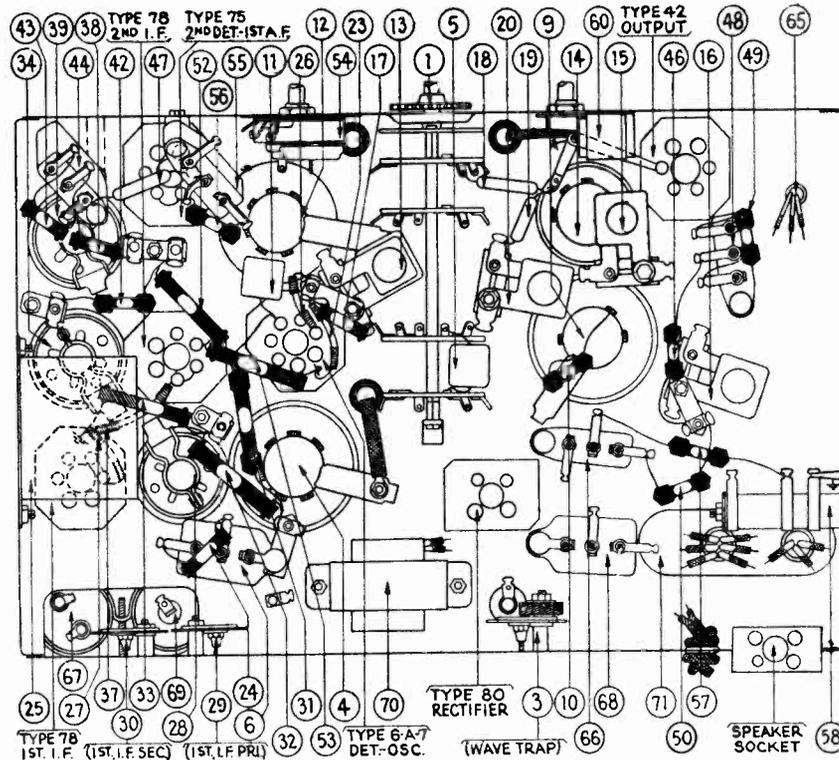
Bottom View of Chassis, Showing Parts, and Position of Compensating Condensers Located,—and Reached,—from Below Chassis.
